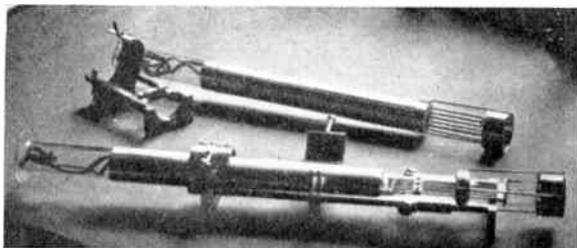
Assembly jigs for H.T. Rectifier electrodes.
